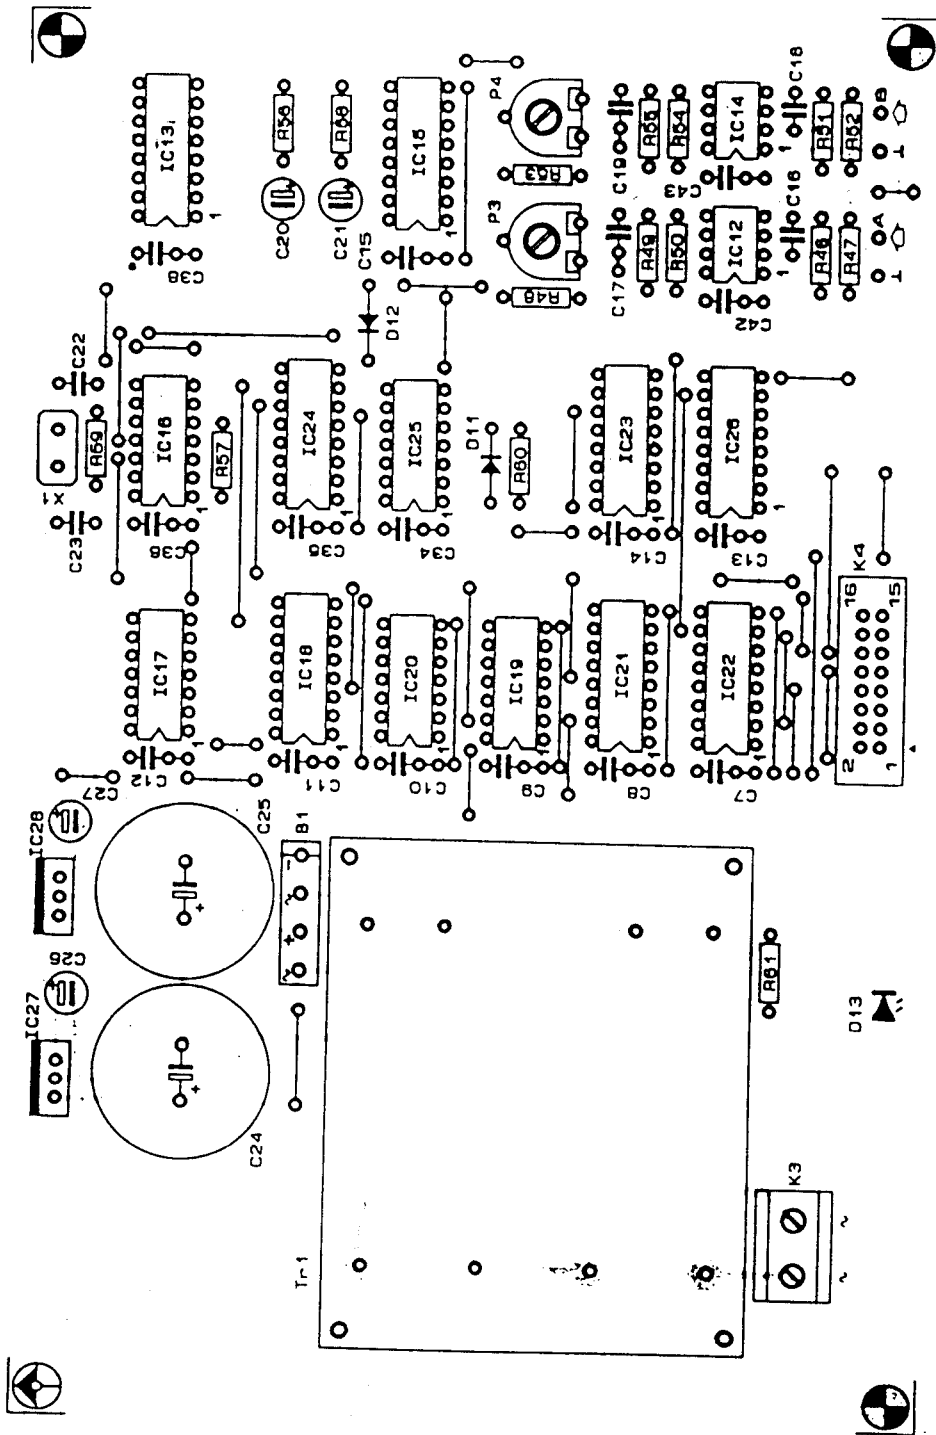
COMPONENT SIDE LAYOUT OF THE MOTHER BOARD
